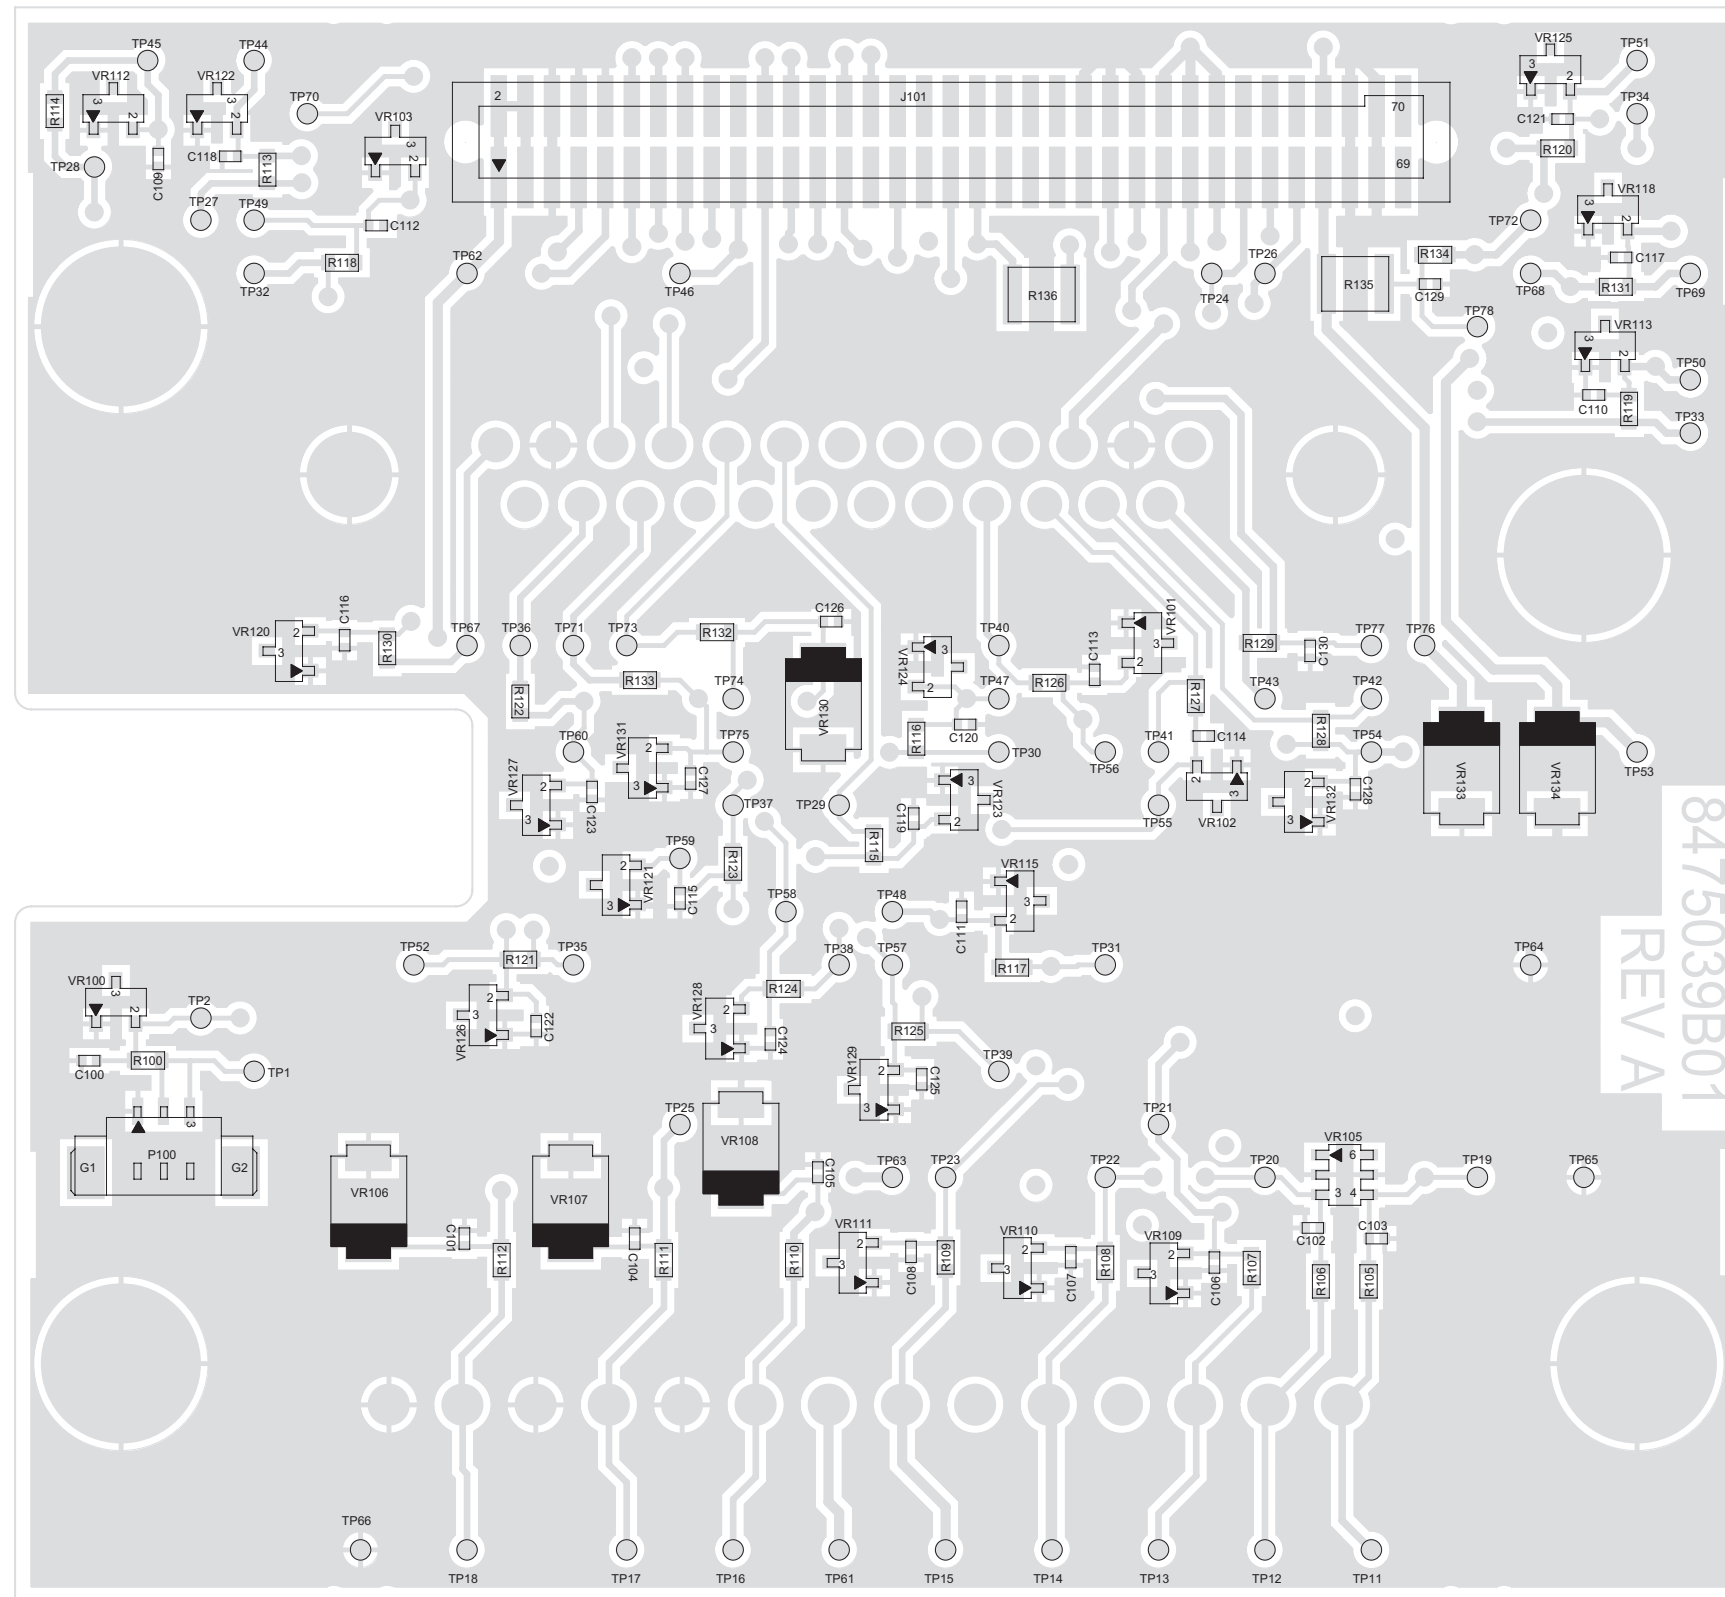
PPLN1691A Low Speed Circuit Board Layout - Side 2
